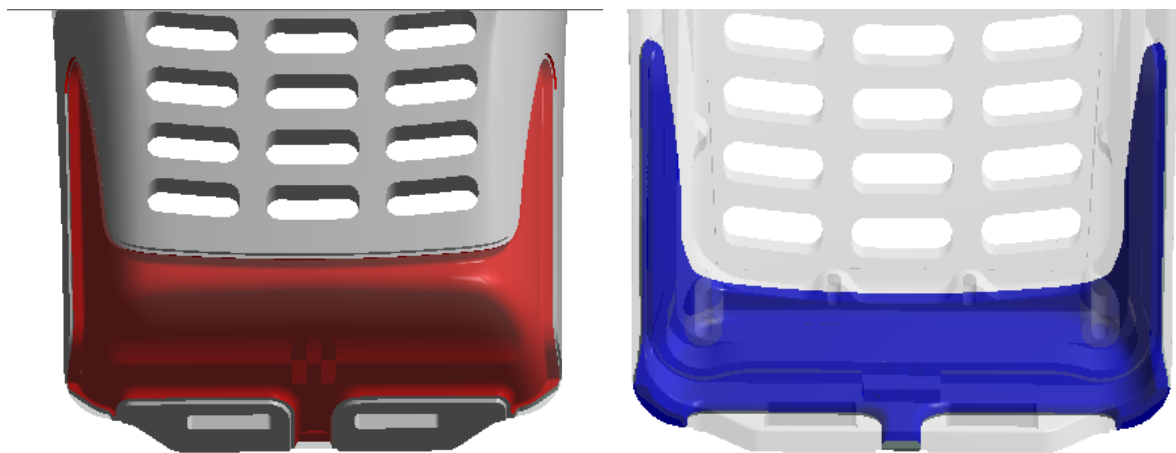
Face to face bonded condition between front panel (red) and front panel over-moulding (blue)
